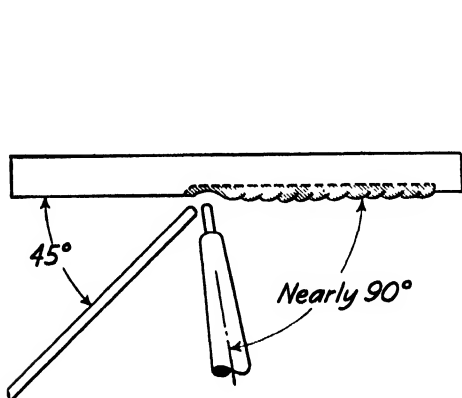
In welding in the overhead position, hold the torch at nearly 90 deg to the surface. Use somewhat less heat than for other positions in order to keep the puddle small.
